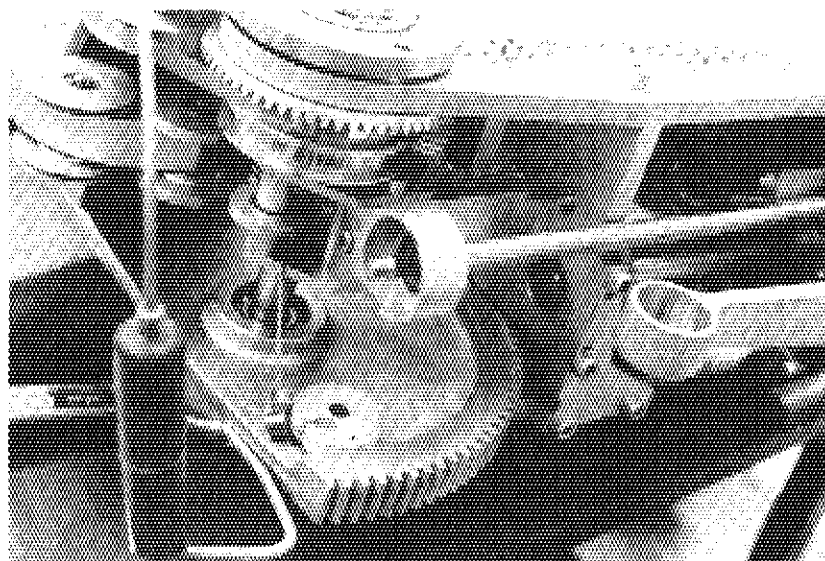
Disassembled winding reel and wire end for handle grip motion at the part of slave arm shoulder of the type A 100 standard manipulator
